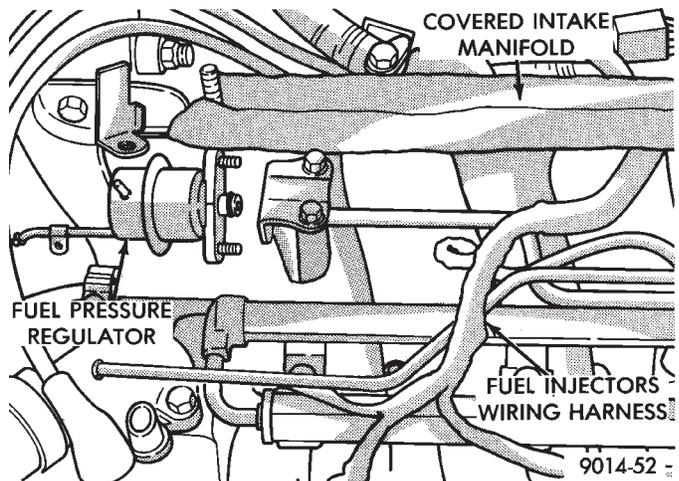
Fuel Pressure Regulator to Fuel Rail Assembly
